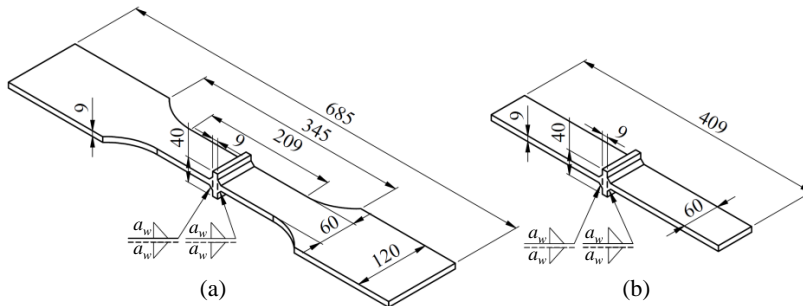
Shape and dimensions (in mm) of S960 LCX specimens with double-sided fillet welds. Joints subjected to (a) axial loads and (b) bending loads. Weld throat thickness was varied between  $a_w = 3\text{--}5$  mm.
